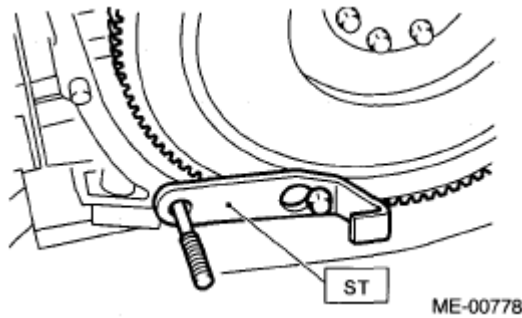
Identifying Crankshaft Stopper ST 498497100 On Flywheel
